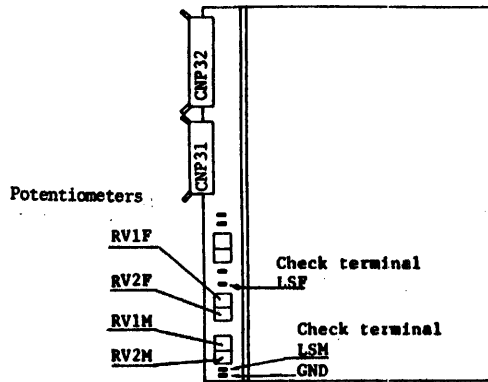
PCA 1A04 located in the MTU logic gate assembly.
